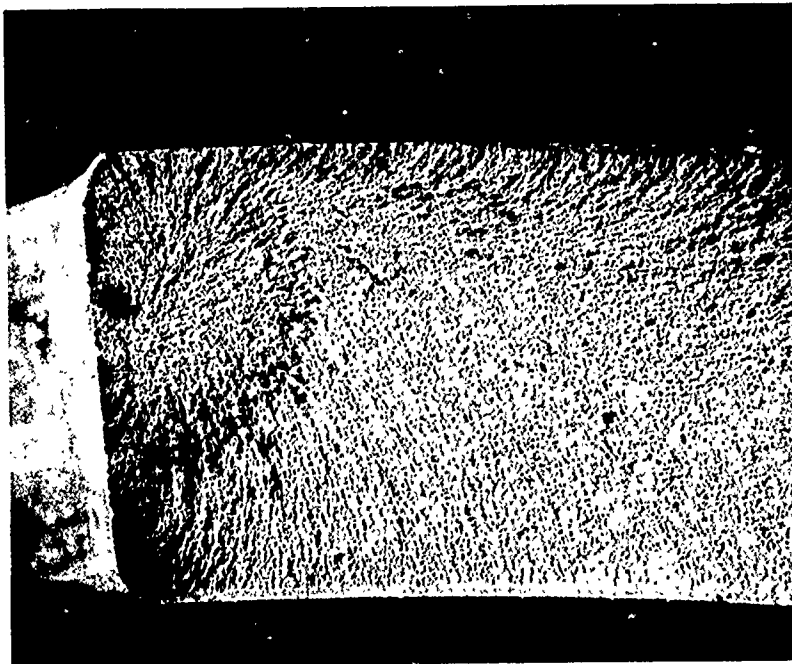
Fracture Origin from a UHT. Shaft Removed from A-7B-137
